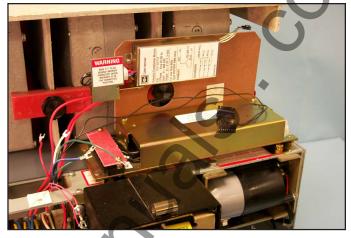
Aux. CT Module Assembly Installed on the Breaker and Preliminary Routing of the Sensor Harness, DTA Wires, and CPT Wires.
